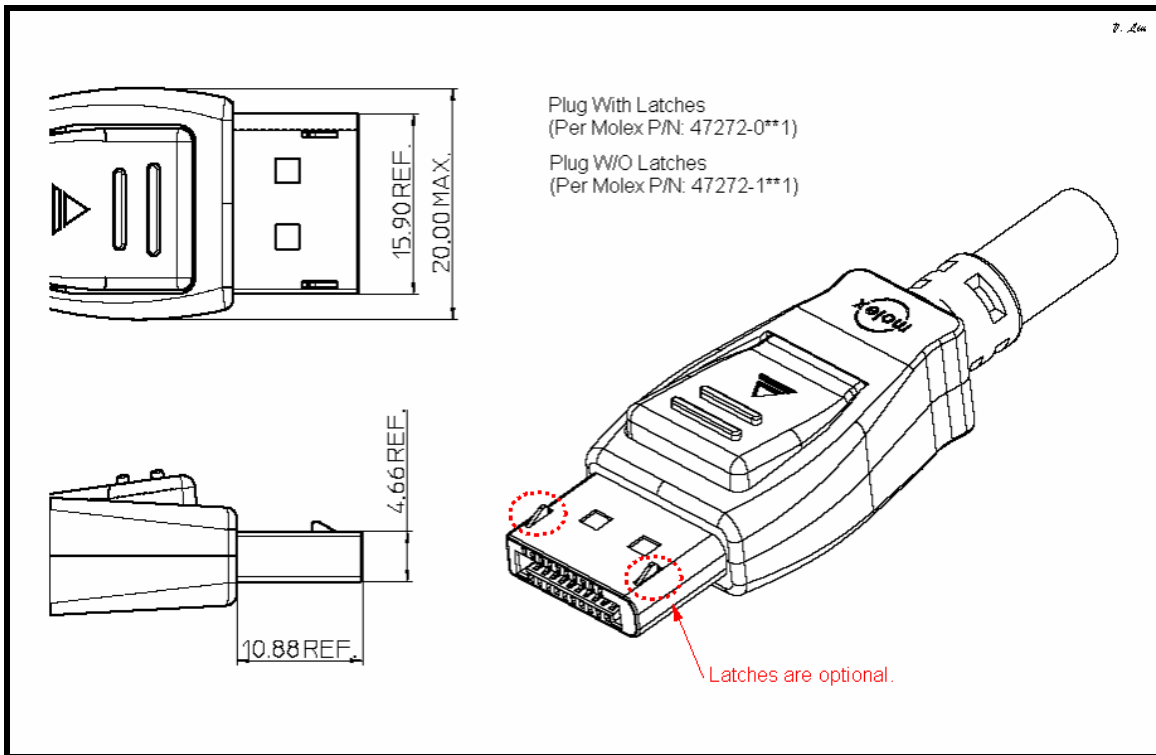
DisplayPort External Cable-Connector Assembly Drawings
